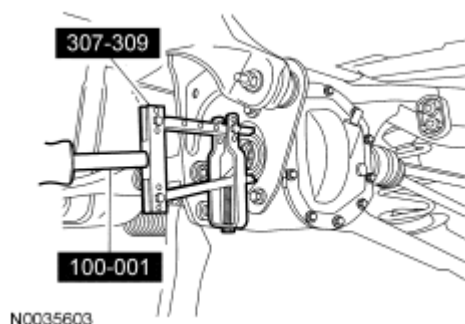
Removing Stub Shaft Seal Using Special Tools (307-309, 100-001)
